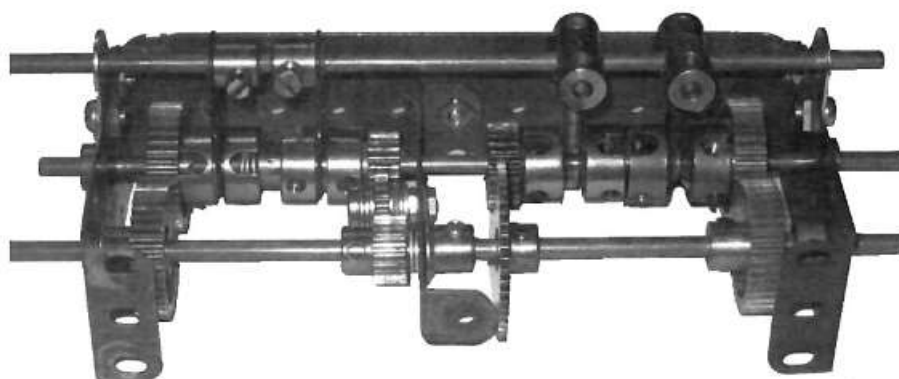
Mock up of steering mode gearbox. Input (axle 1) from left bottom, outputs from right, axle 3 top, axle 2 bottom. Lower axle is in 2 parts, join in the boss of the short Crank (centre). Collars between Socket Coupling alone fixed to top shaft.
